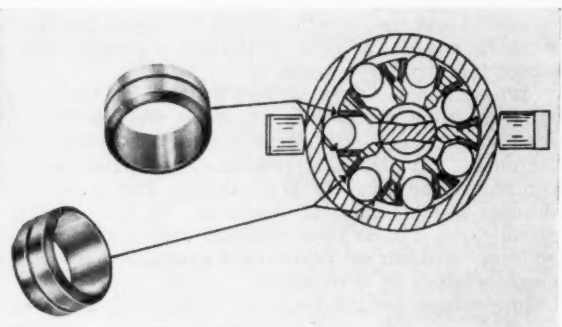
These ball pistons in a hydraulic pump ride in Flame-Plated bushings. The tungsten-carbide coated steel bushings are extremely resistant to wear and, in addition, have the same coefficient of thermal expansion as the steel balls and cylinder block—a combination of qualities which make the design of this pump practicable.
